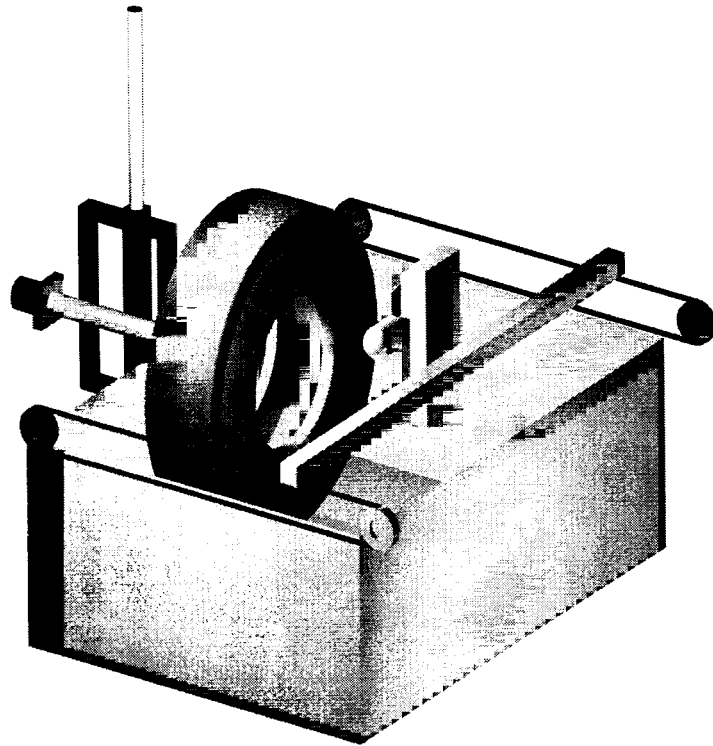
Tank and drive setup of the Ultrasonic Inspection Machine
